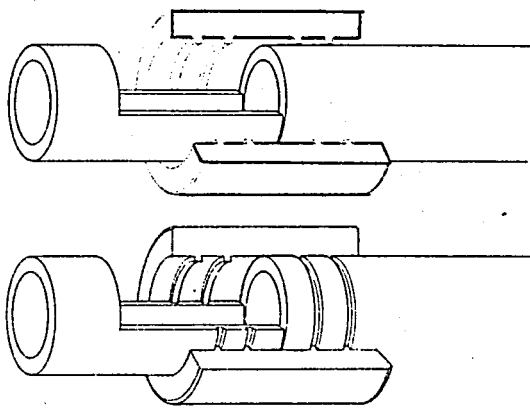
Hydraulic-tube couplings for the Grumman F-14 jet fighter fabricated from a Nitinol alloy [2].
